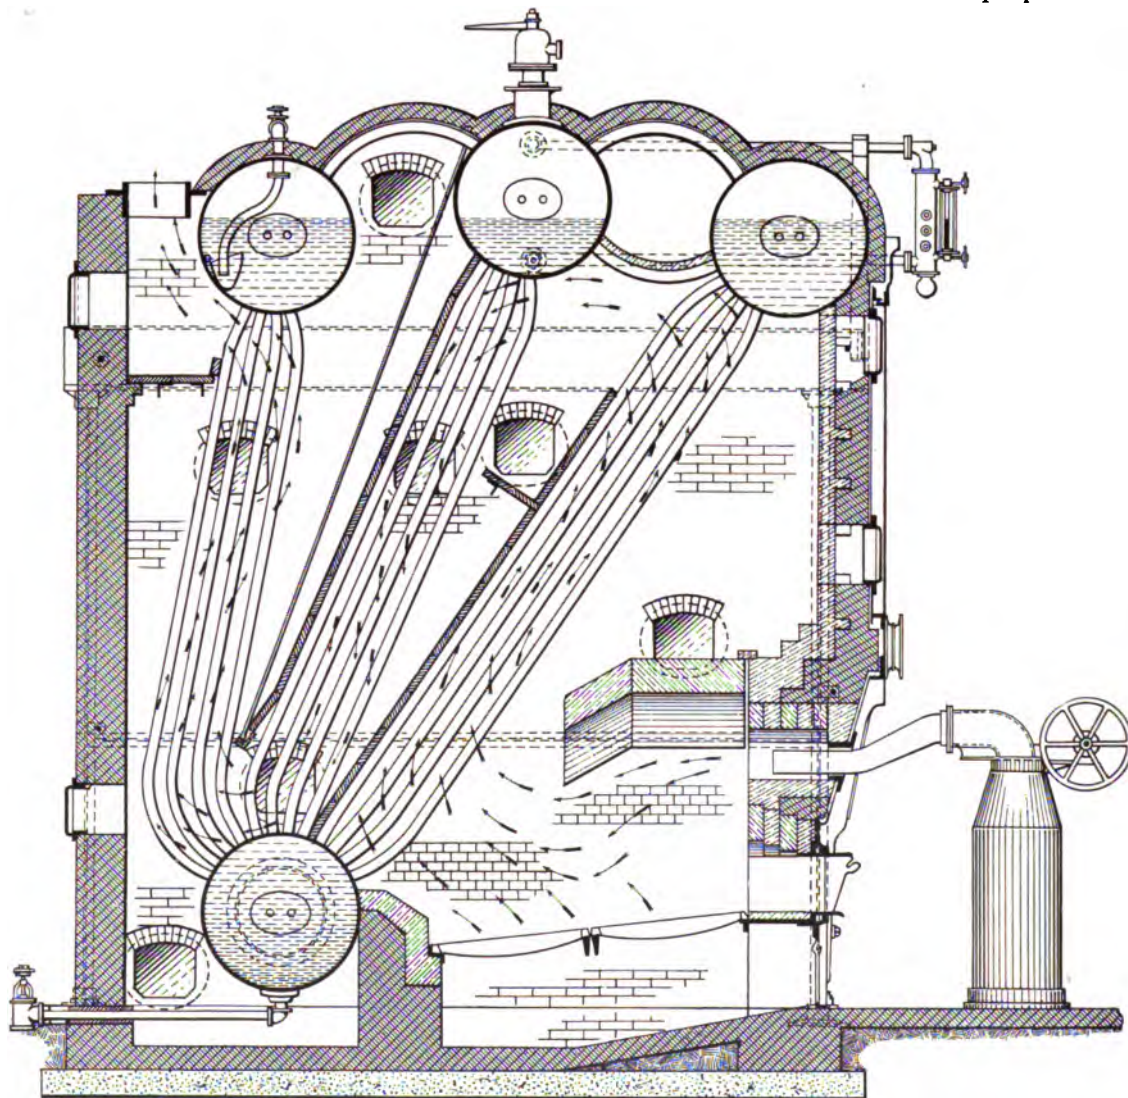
SECTIONAL SIDE ELEVATION OF STIRLING BOILER FOR BURNING BLAST FURNACE GAS
